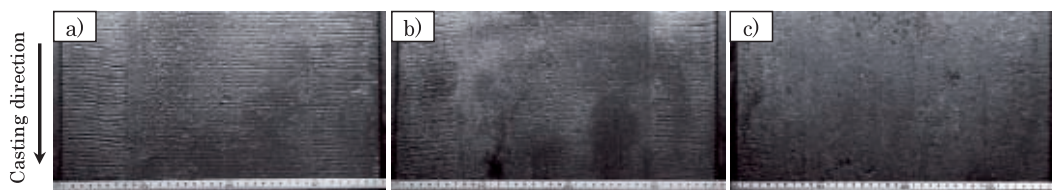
Appearance of bloom surfaces. (a) Casting condition 1, (b) Casting condition 3, (c) Casting condition 5
